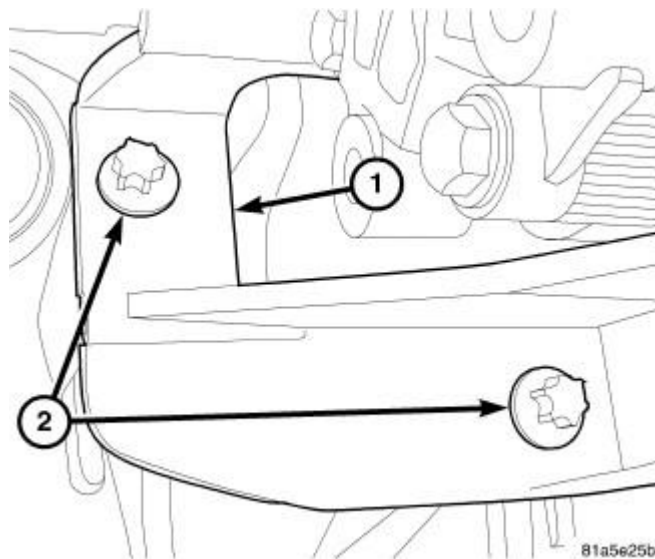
REAR PUMP MOUNTING BRACKET BOLTS - 2.7L
